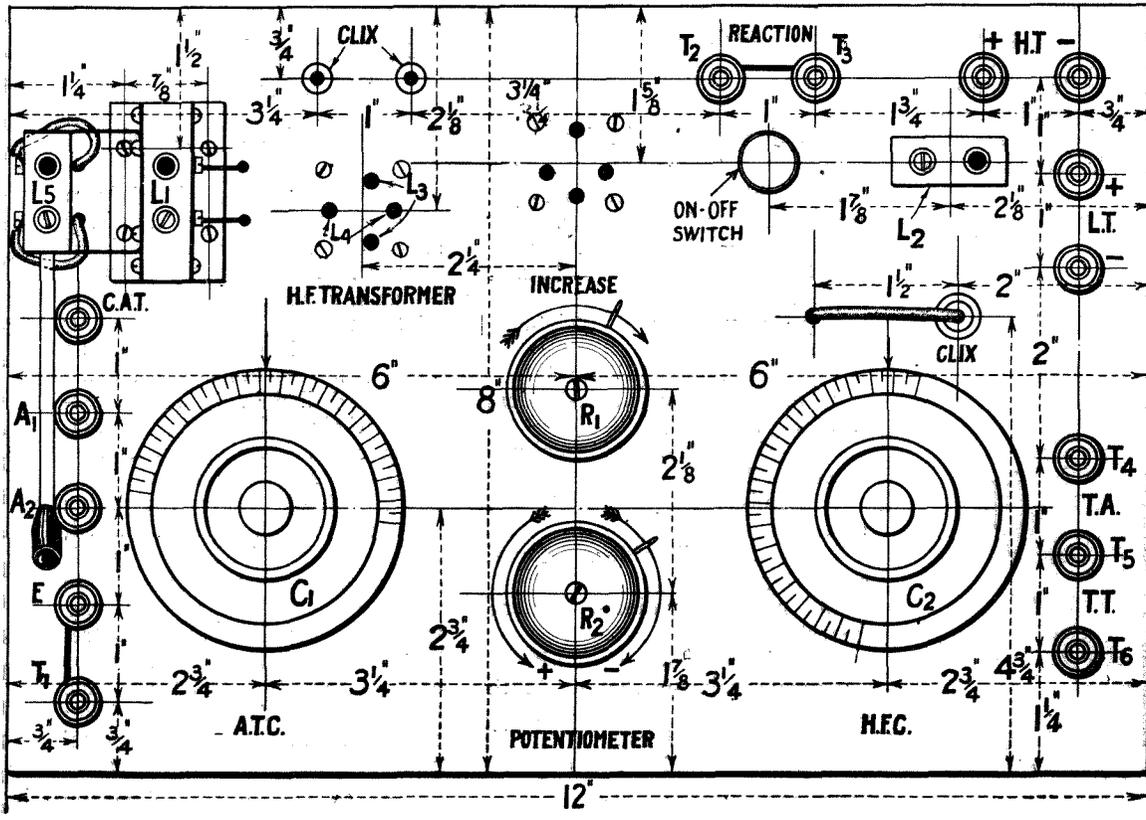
This dimensioned drawing of the panel layout is exactly to scale.
